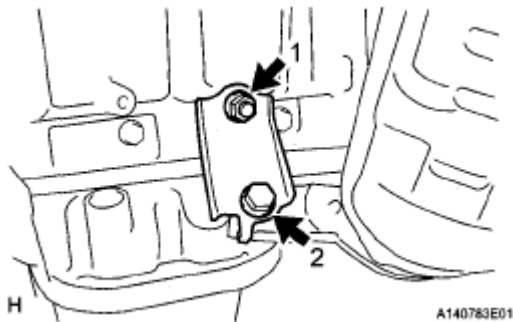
Identifying No. 2 Manifold Stay Bolt & Nut
